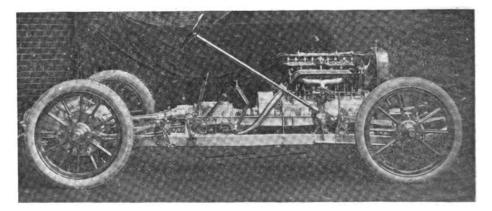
Chassis of the 1909 American. This roadster frame assembly embodies a supplementary frame, which is supported by raised cross members and upon which the engine, gear set and steering gear are assembled. The contral spring hangers, which locate the position of the arise, are rived to the frame and the outer ends of the frame is supported from the springs by forged links which are in turn fastened by riveted forged heads. It is this method of frame construction and suppension which is a distinctive feature of the roadstor, and which provides a low center of gravity. While this method of construction gives the appearance of but small clearance, yet the large wheels provide a minimum clearance of 10½ inches, which is considerably more than that of many cars of more conventional design.
